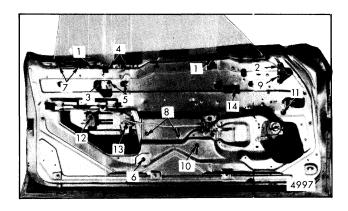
Front Door Window Removal and Adjustment - "A-37, 57 and 80" Styles
